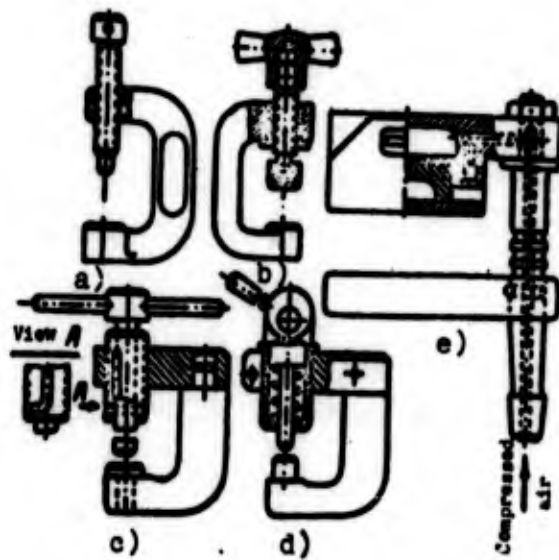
Design varieties of screw clamps: a, b and c) screw; d) eccentric; e) pneumatic.
